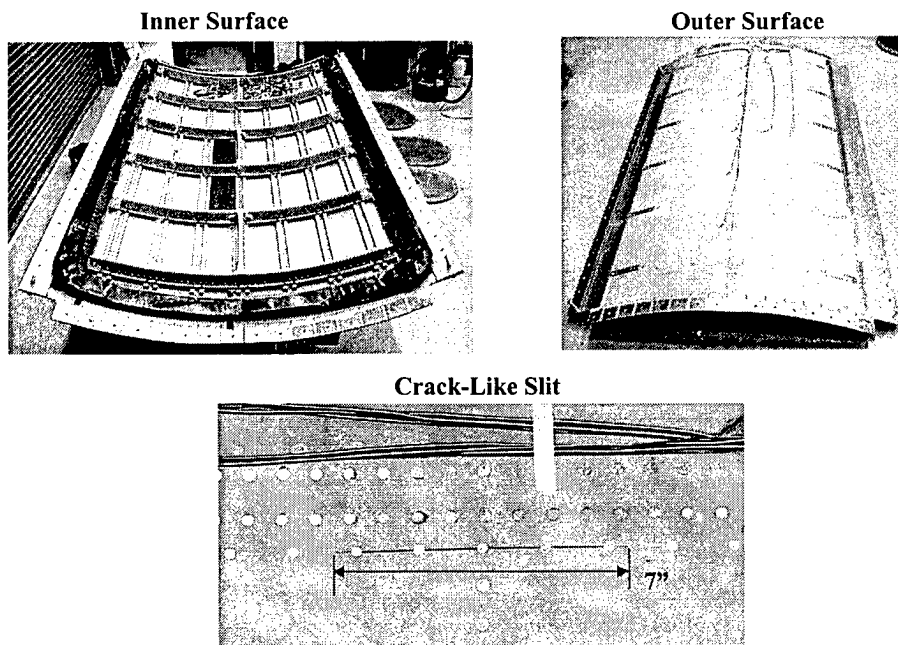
PHOTOGRAPHS OF PANEL CVP1 SHOWING THE INNER AND OUTER SURFACES AND THE INITIAL CRACK-LIKE SLIT
